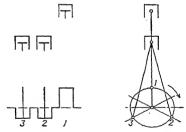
Crank arm arrangement for the three-cylinder in-line engine.
